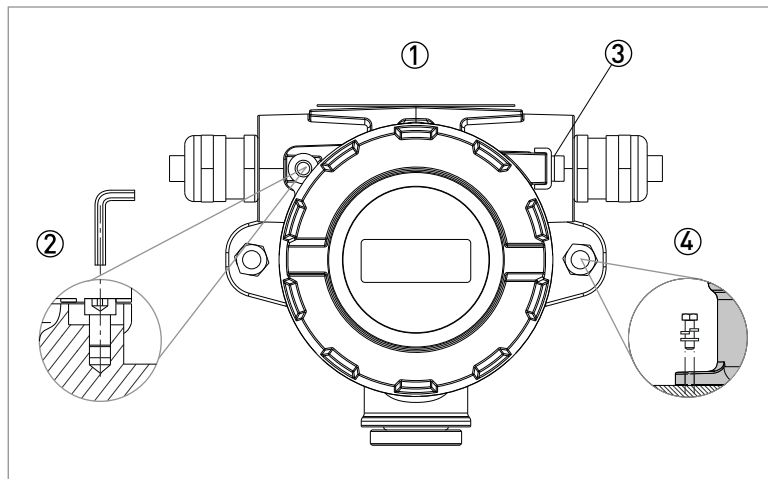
Wall mounted installation example with aluminium TFA-100
